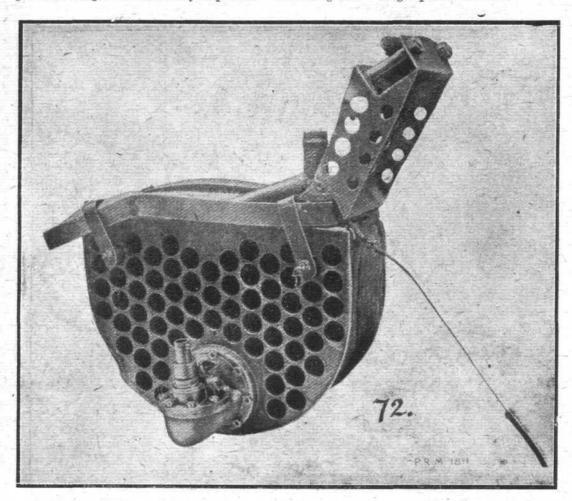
Oil radiator and gear pump of fiveengined giant.
